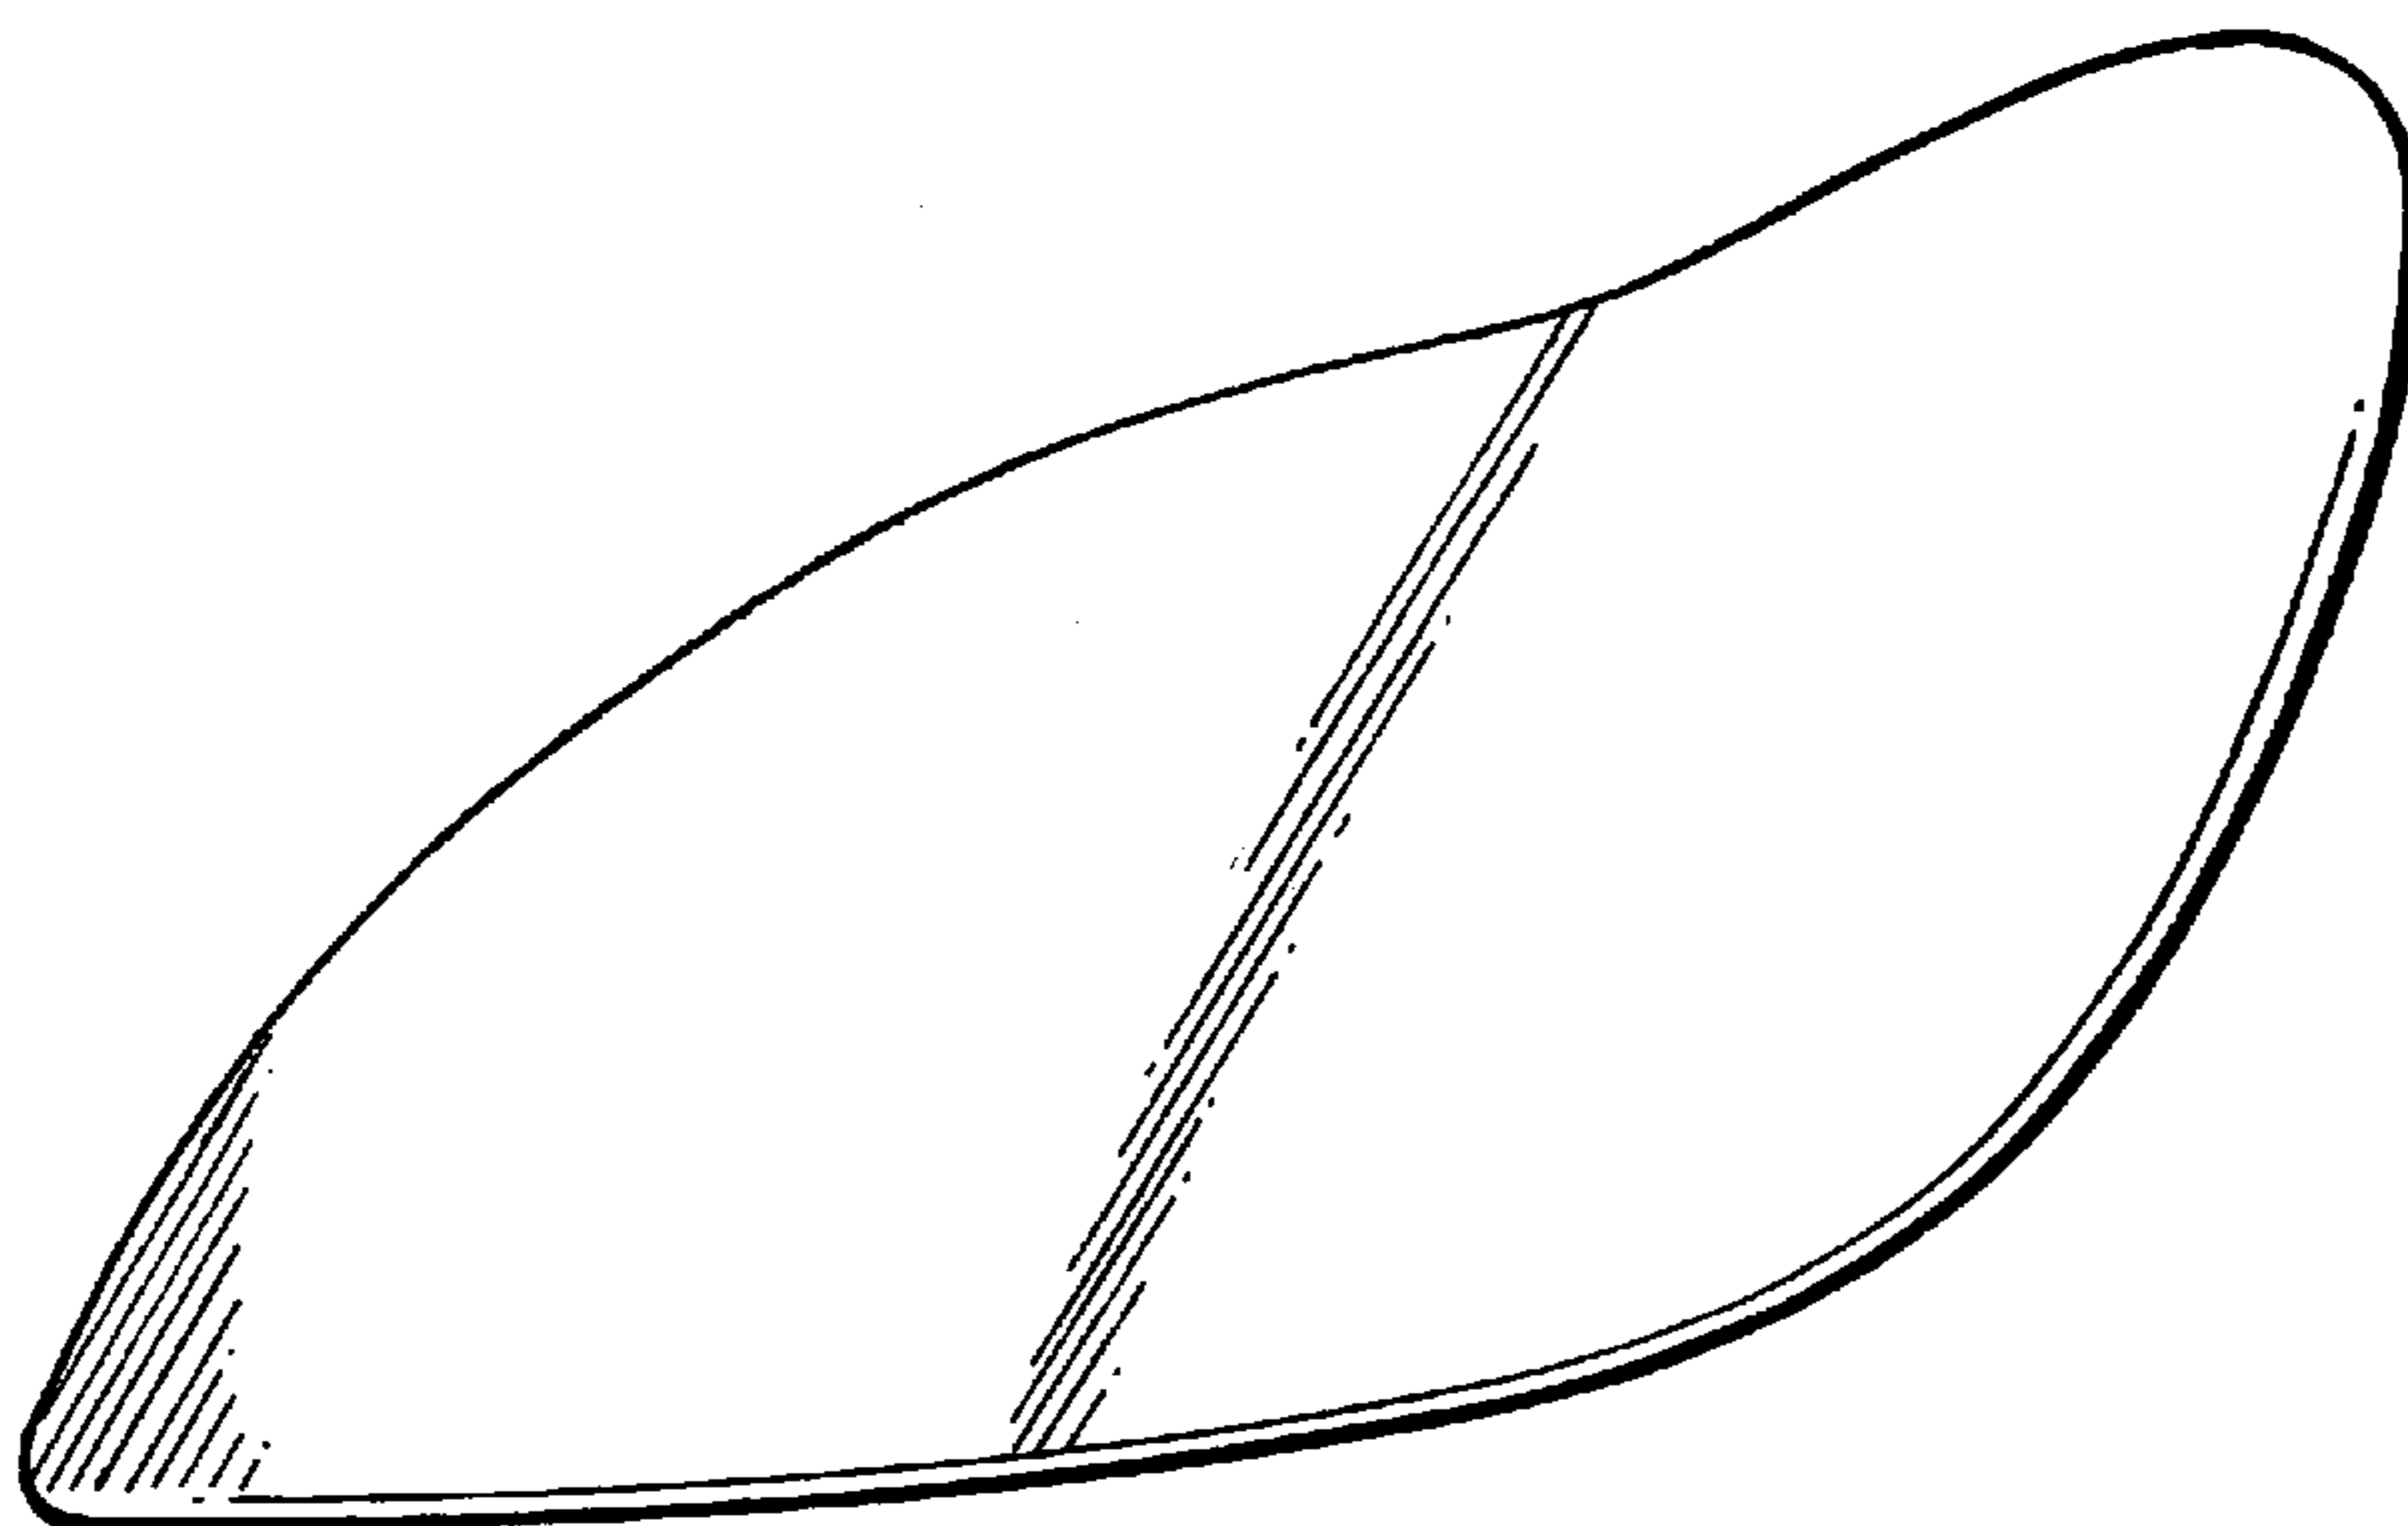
is a top view of a three dimensional embodiment of a design for vehicle headlight silhouette according to my novel design;
